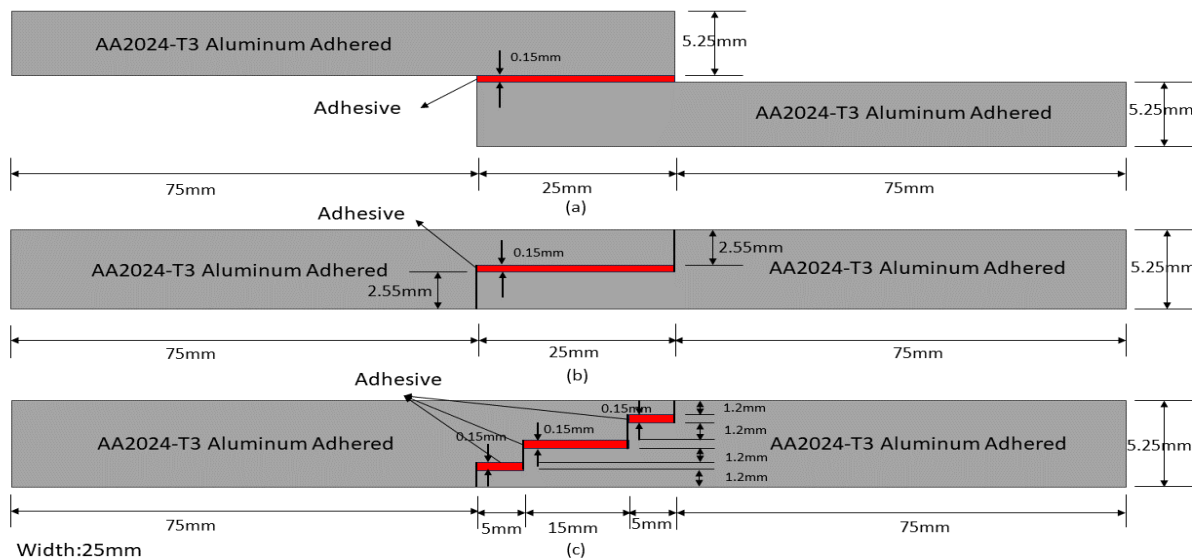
Dimensions of the adhesively bonded joints: (a) single lap joint (Type-I), (b) one-step lap joint (Type-II), (c) three-step lap joint (Type-III)
